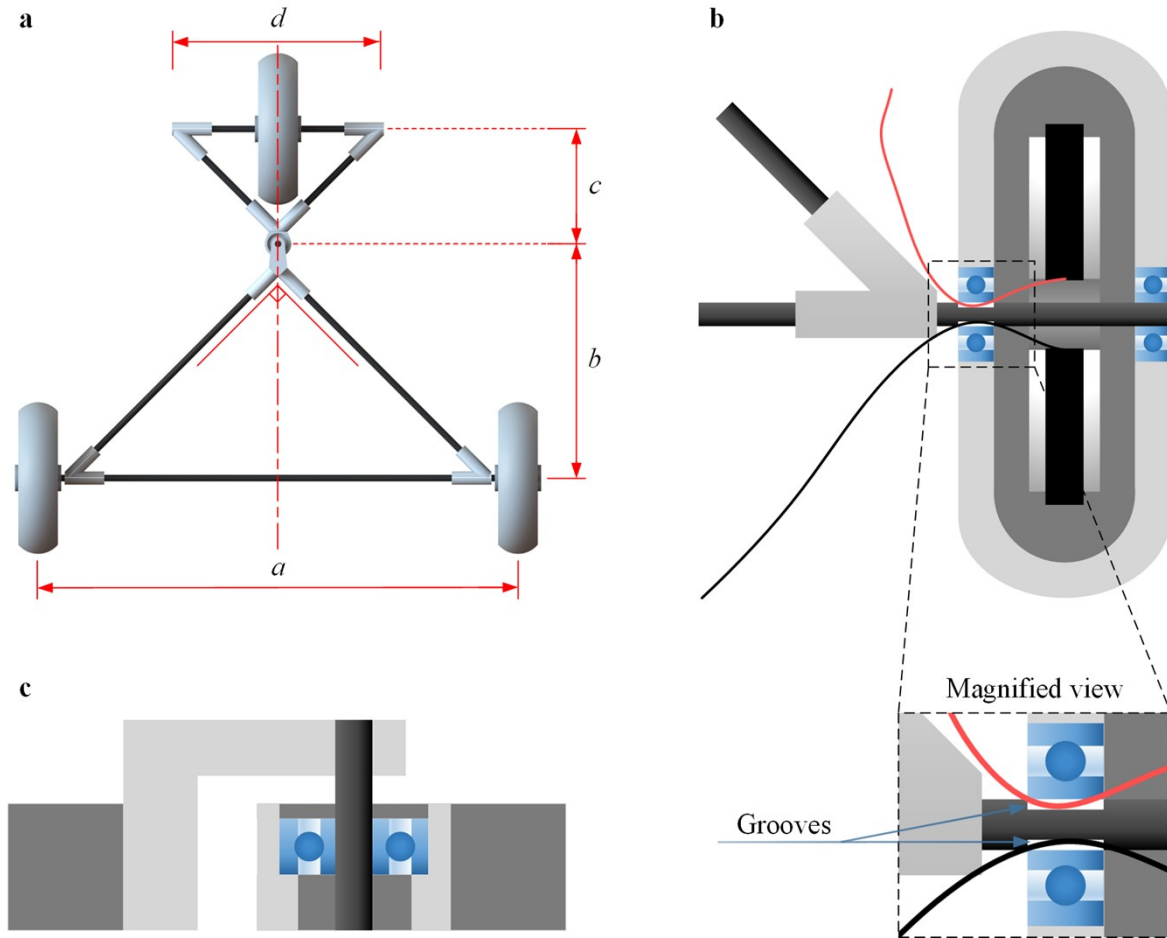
Detailed sizes and description of each part. (a) Top-view of the mobile chassis with related design sizes. (b) Top section view of the driven wheel. (c) Side section view of the steering device.
